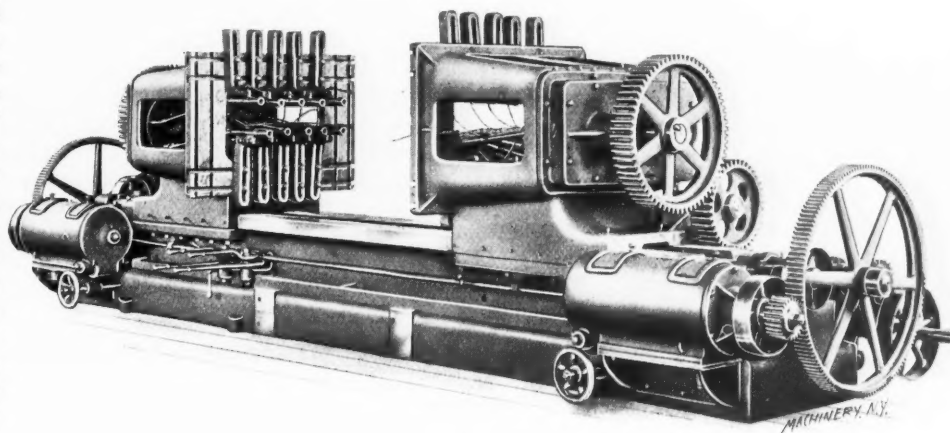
Double-head, Ten-spindle Baush Horizontal Drilling Machine.
